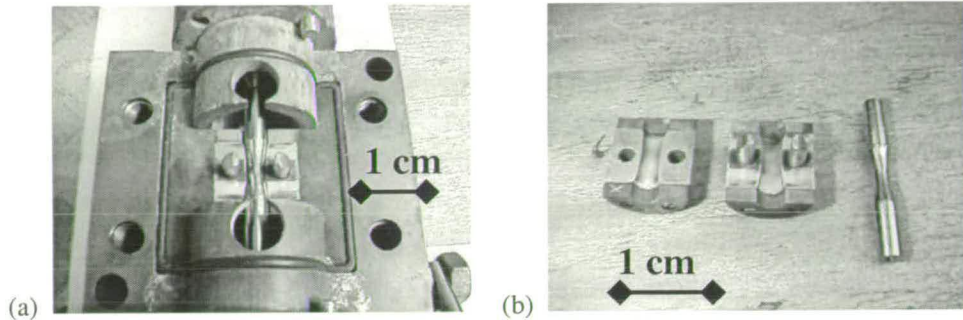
(a) cell arrangement for machining of tensile test specimens and (b) split tooling and pre-form workpiece
